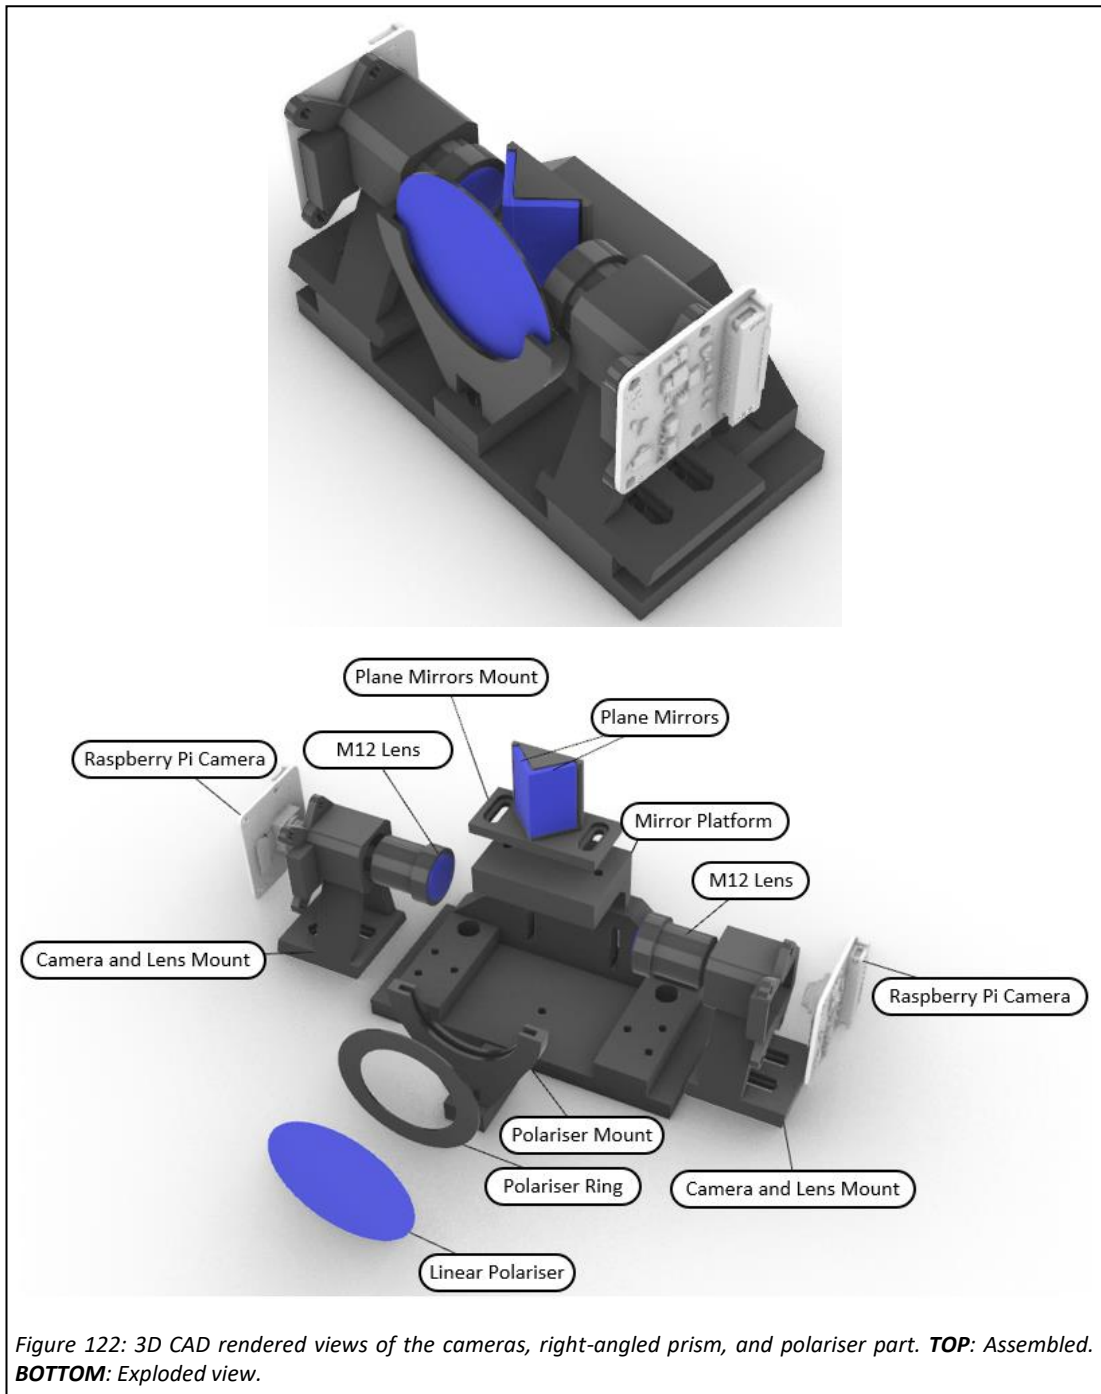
3D CAD rendered views of the cameras, right-angled prism, and polariser part. TOP: Assembled. BOTTOM: Exploded view.
